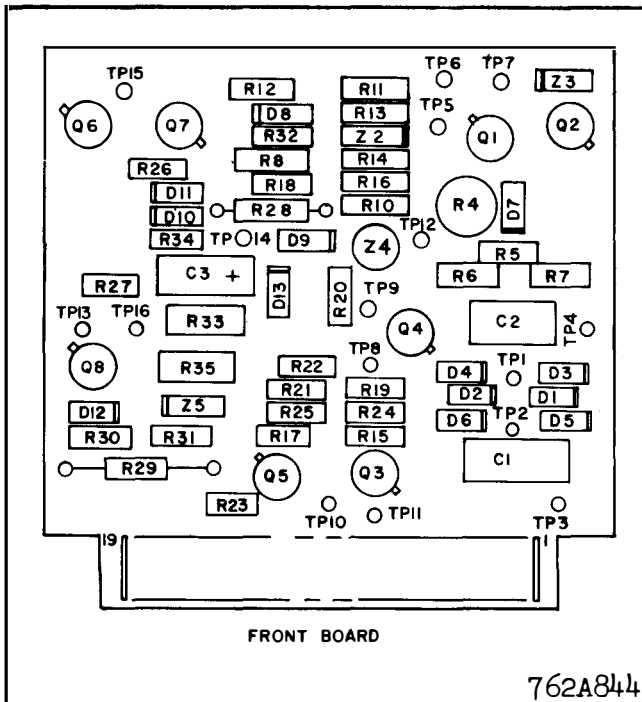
Component Location for the Front Printed Circuit Board of the Type SKA Relay.
